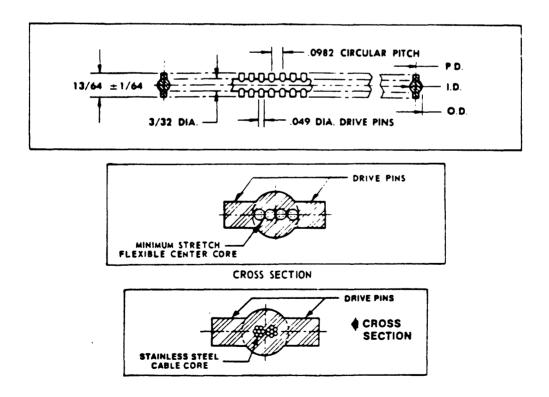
Precision Industrial Component "No Slip" drive belt.
